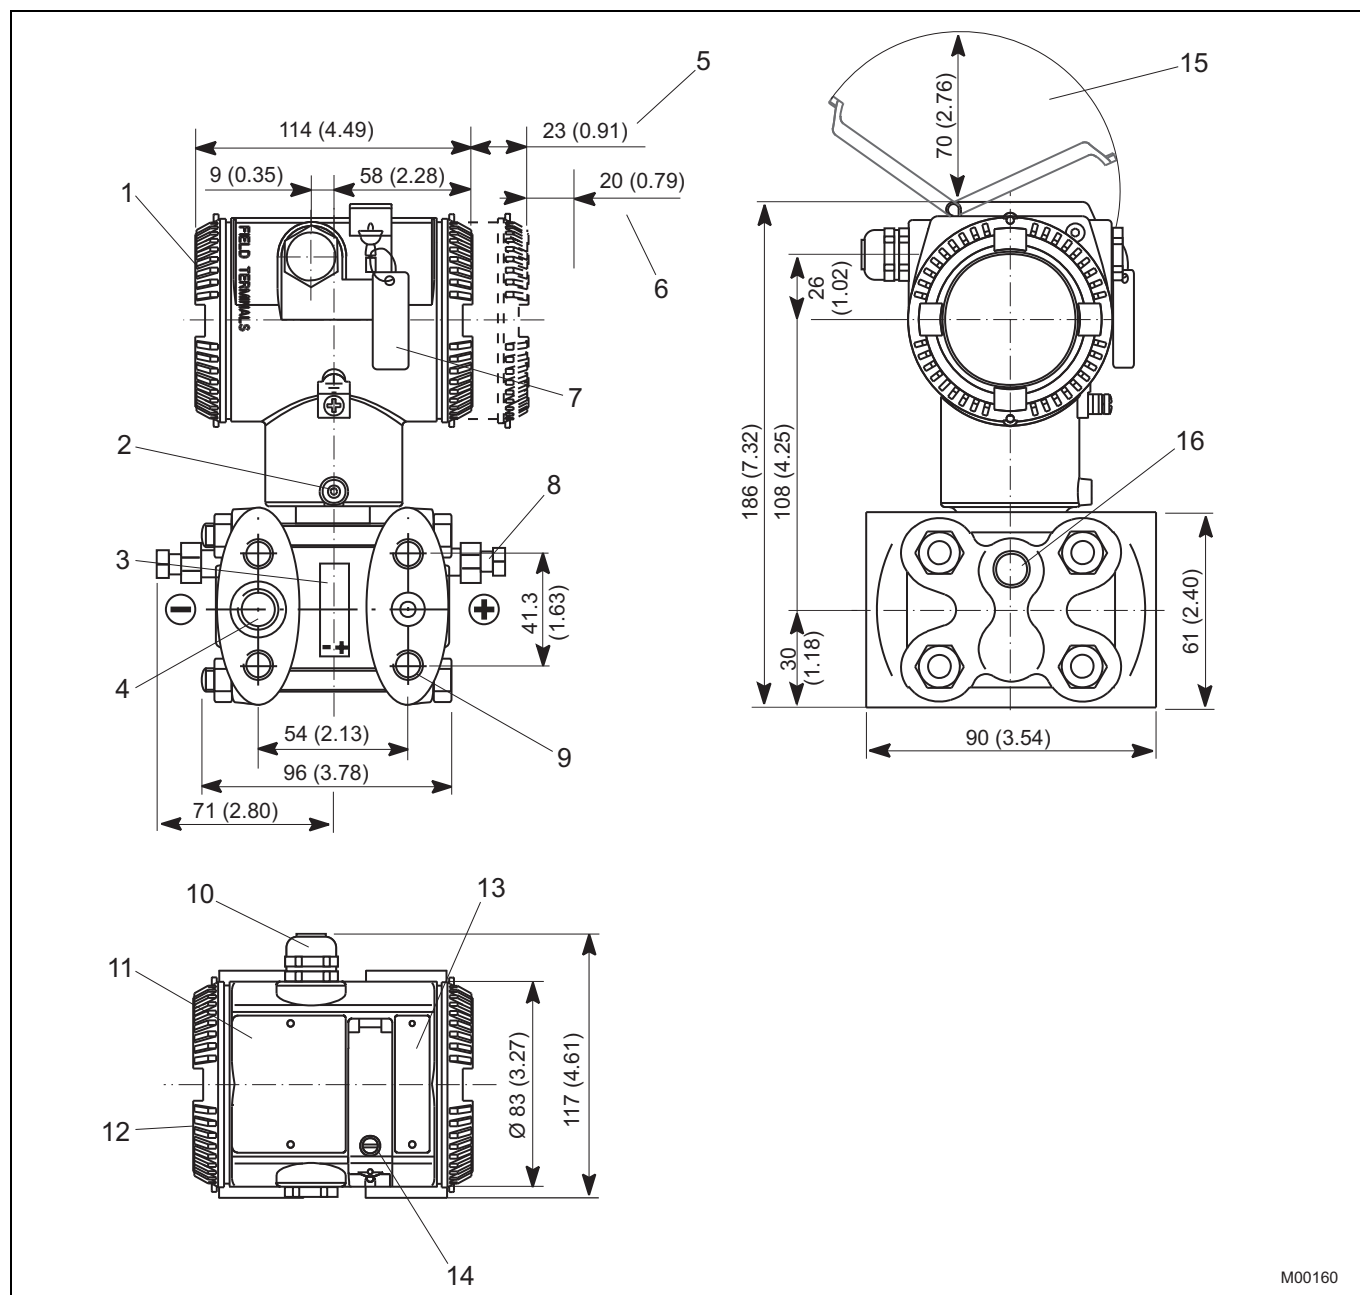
Dimensions in mm (inches), deviations in the drawing are possible
